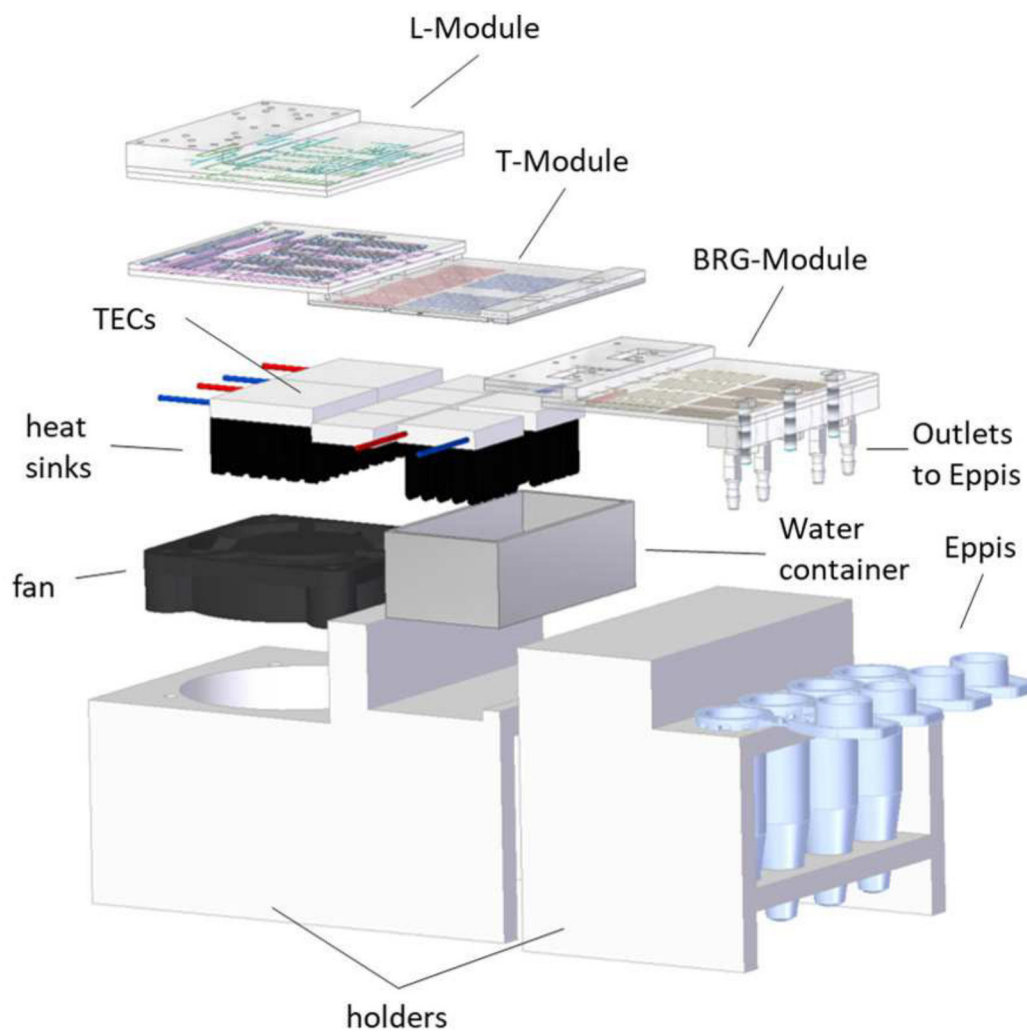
Explosion view of the entire system. The L-Module, T-Module, and BRG-Module are shown as well as the TECs required for heating and cooling, with their respective heat dissipation mechanisms: heat sinks and water container or fan. The holders to support the entire system are also shown.
